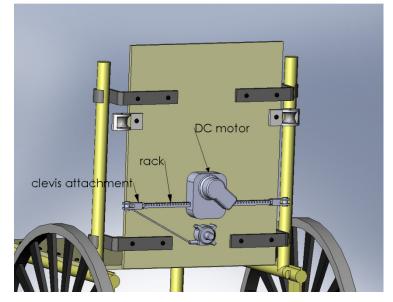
ACTUATOR MOUNTED ON THE BACK OF THE CHAIR
